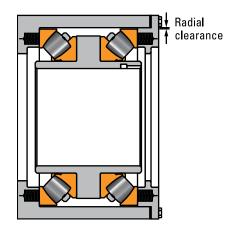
Face-to-face mounting arrangement of a TSR-EM bearing set.
